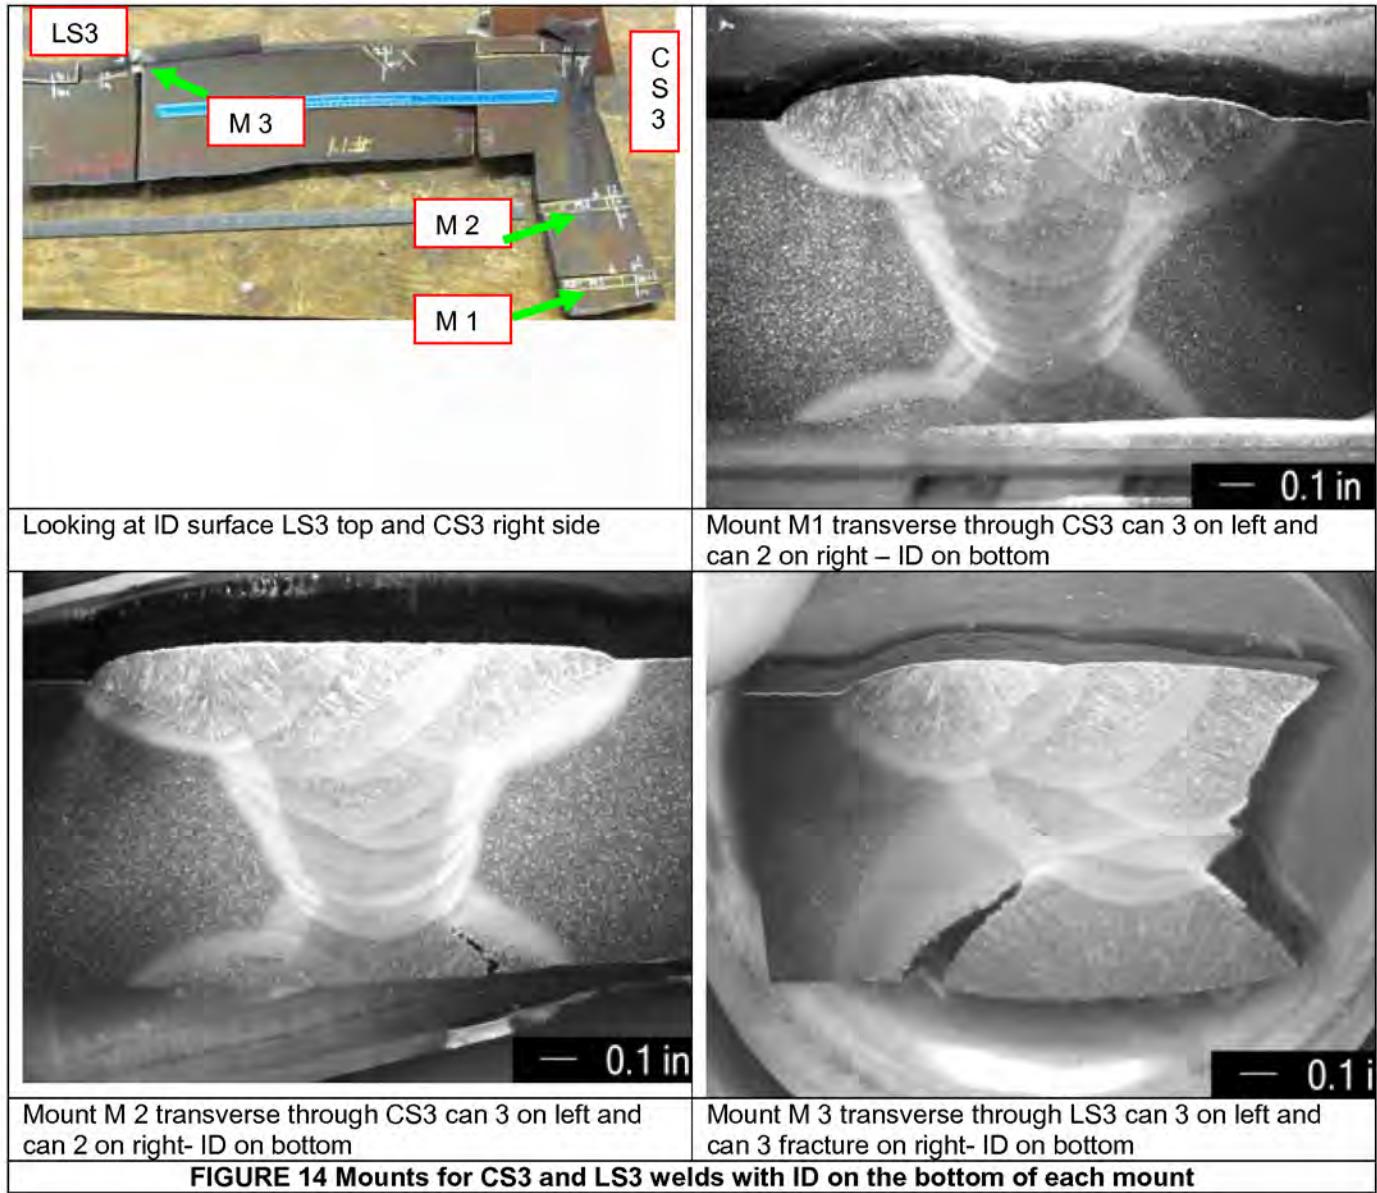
Mounts for CS3 and LS3 welds with ID on the bottom of each mount
